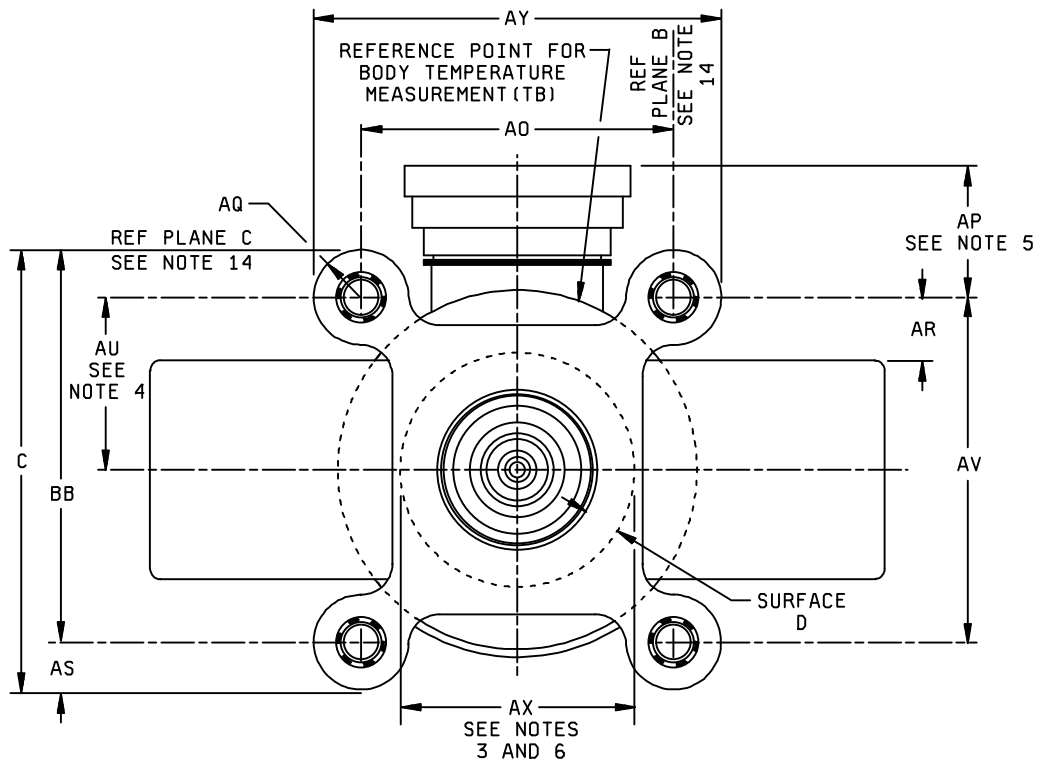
A. Alternate outline drawing of electron tube type DOD-042 (bottom view).
